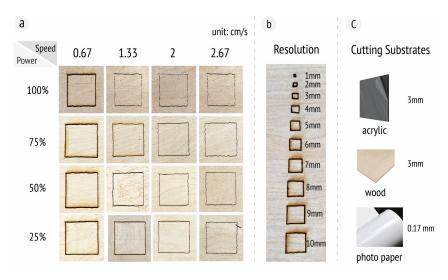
laser cutting head testing: (a) Speed and power testing. (b) Resolution testing. (c) Substrates that laser cutting head can cut.
